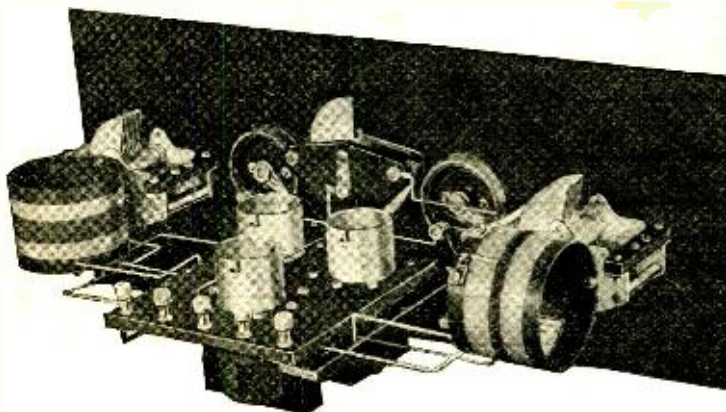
How the parts appear from the rear of the panel all mounted and wired.
